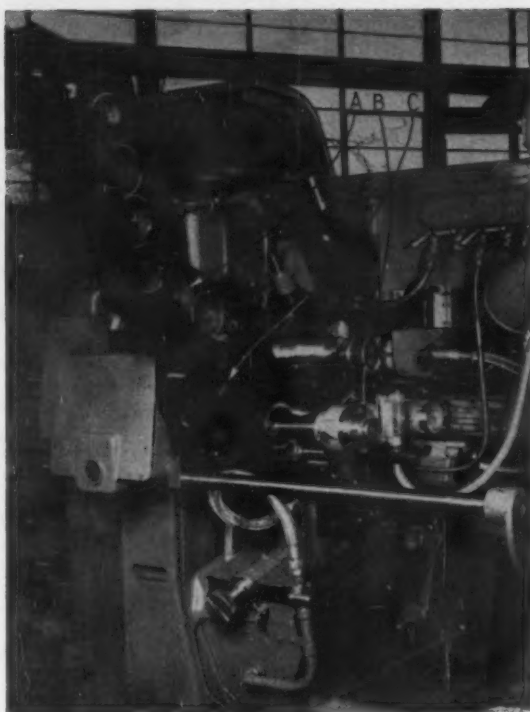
Wickman multi-spindle chucking automatic with transfer arm attachment for loading heavy castings
